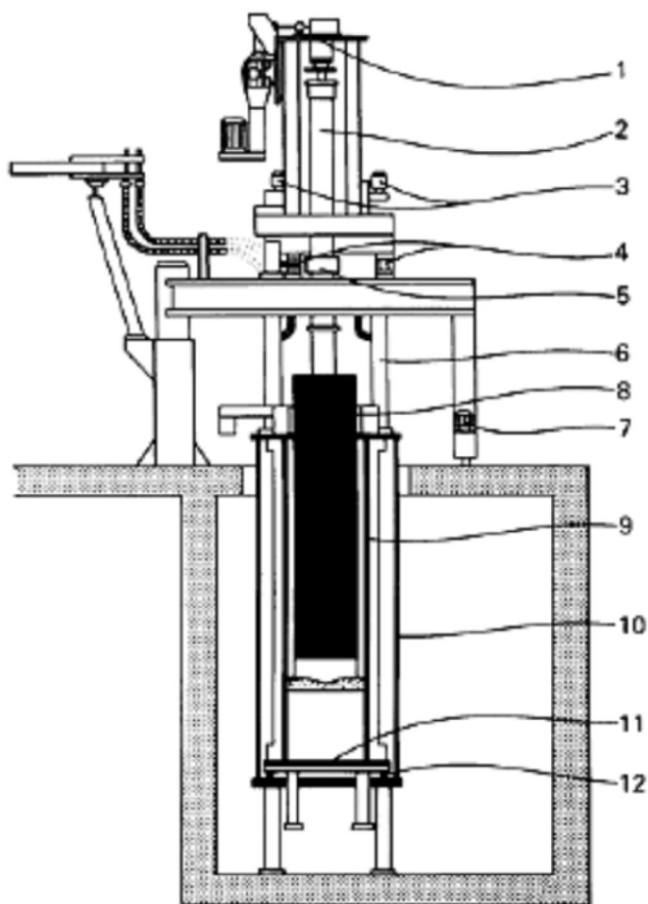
Schematic of an ESR furnace with a stationary mold. 1, RAM drive system; 2, electrode RAM; 3, XY adjustment; 4, load cell system; 5, sliding contact; 6, four bus tubes; 7, pivoting drive; 8, electrode; 9, mold assembly; 10, coaxial bus tube; 11, base plate; 12, multicontacts.
